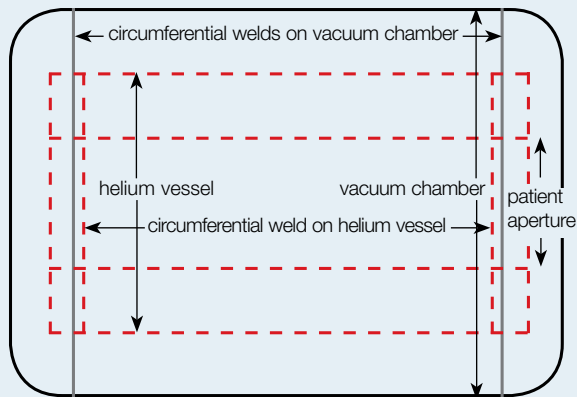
Sketch of the housing of a superconducting magnet, indicating circumferential joints on the helium vessel and the outer vacuum chamber. Longitudinal welds are part of the prefabricated subassembly which is plasma welded according to SMT welding specifications.
